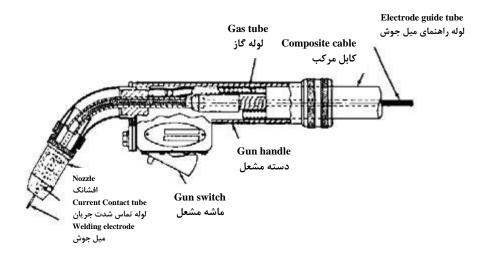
TYPICAL SEMIAUTOMATIC GAS – COOLED, CURVED – NECK GAS METAL ARC WELDING GUN
